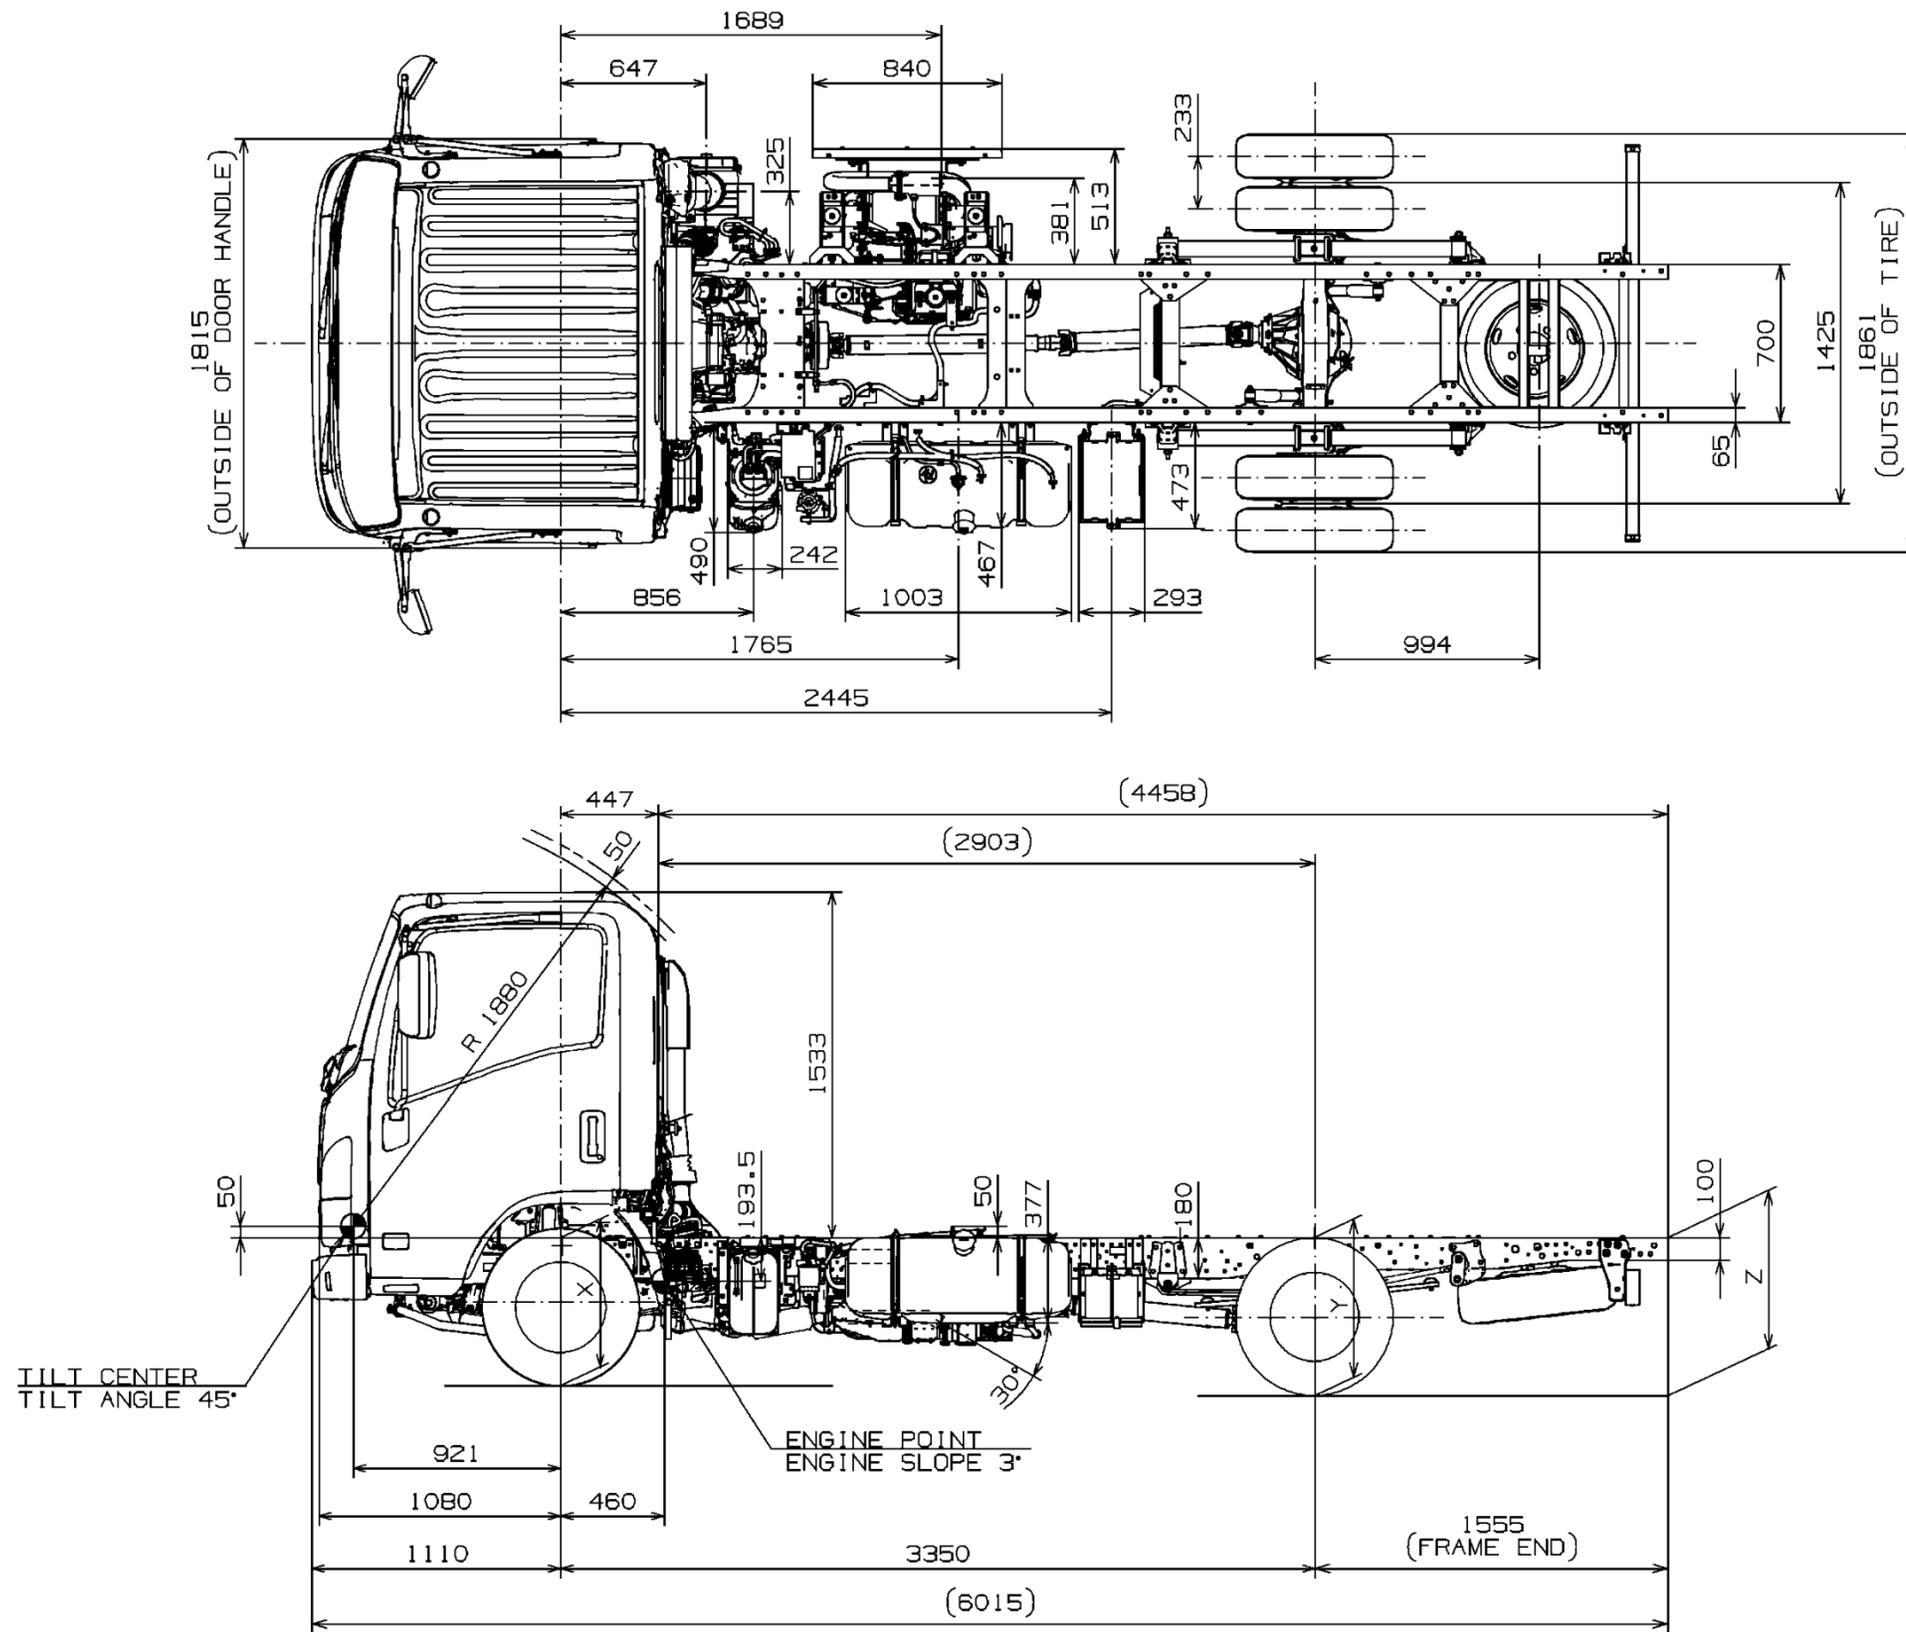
Cab Chassis Drawing NPR85L/U-HH5AYE
